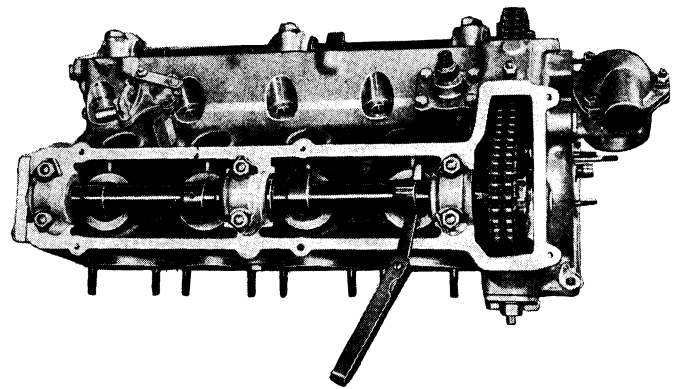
Checking tappet clearance on engine 118 B.000 by means of feeler gauge A. 95113.
